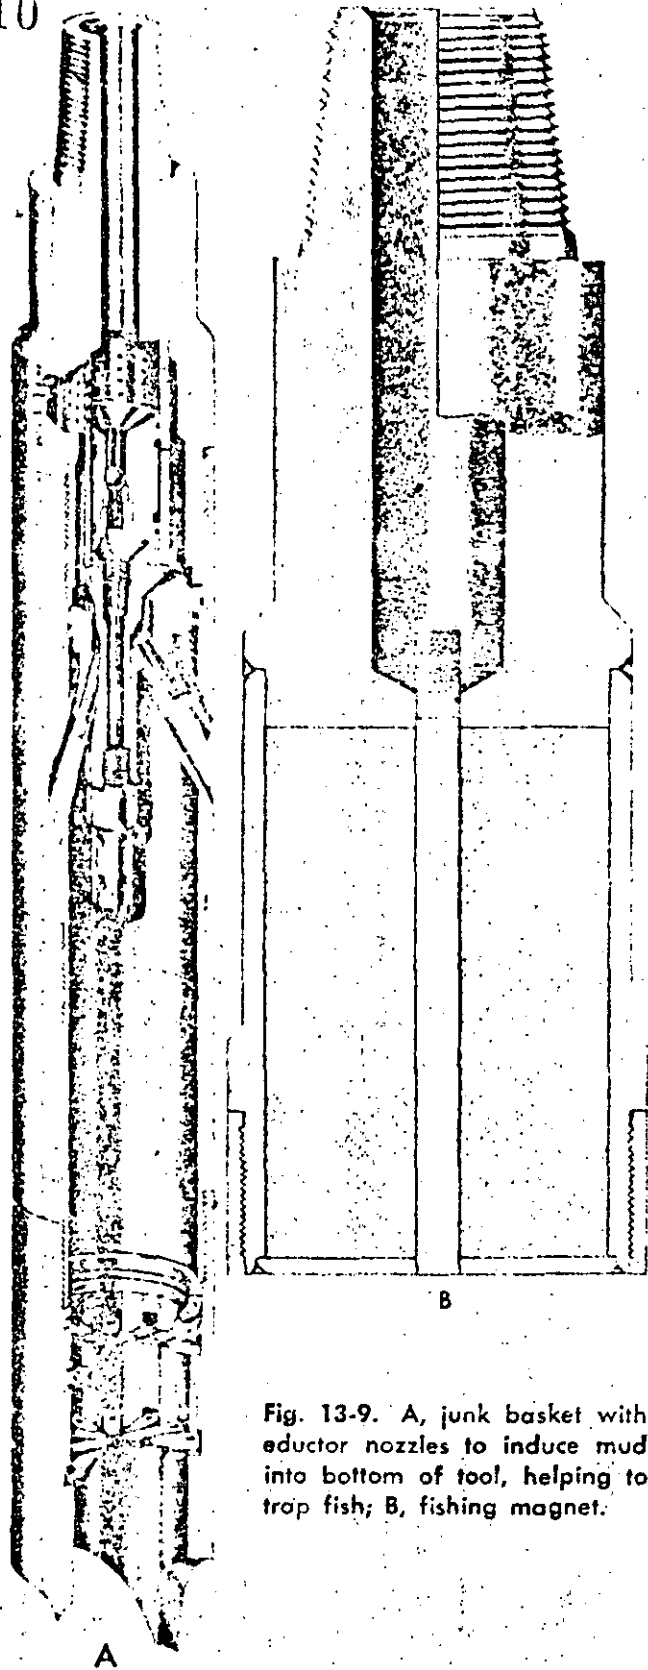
A, junk basket with eductor nozzles to induce mud into bottom of tool, helping to trap fish; B, fishing magnet.
